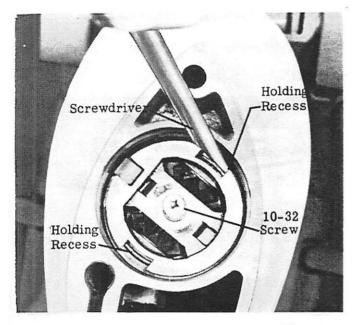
Removing Transmission Assembly III. REMOVING LOWER CONTROL SHAFT ASSEMBLY
